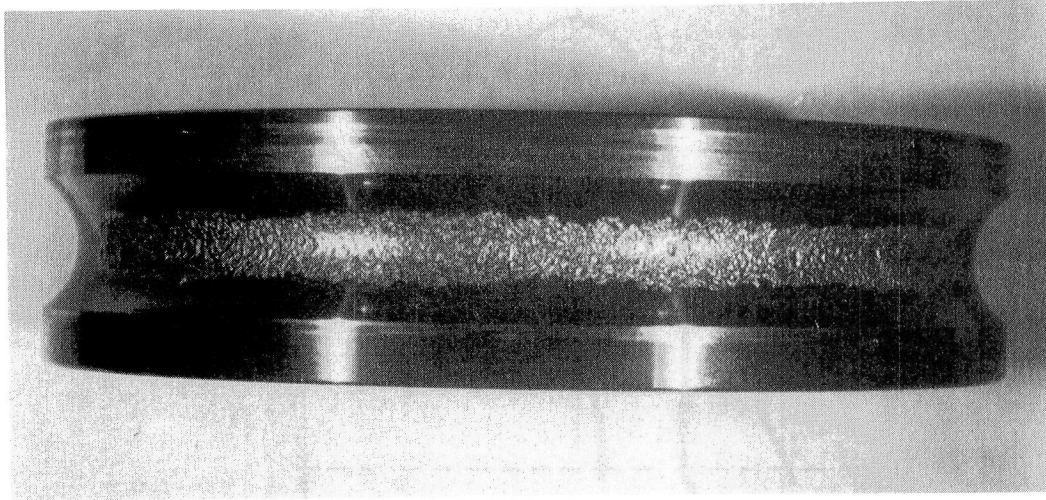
Modified M-50 Bearing Tested Under Same Load Conditions as Those in Figure 14 and Figure 15. This Bearing Spalled But Did Not Fracture
